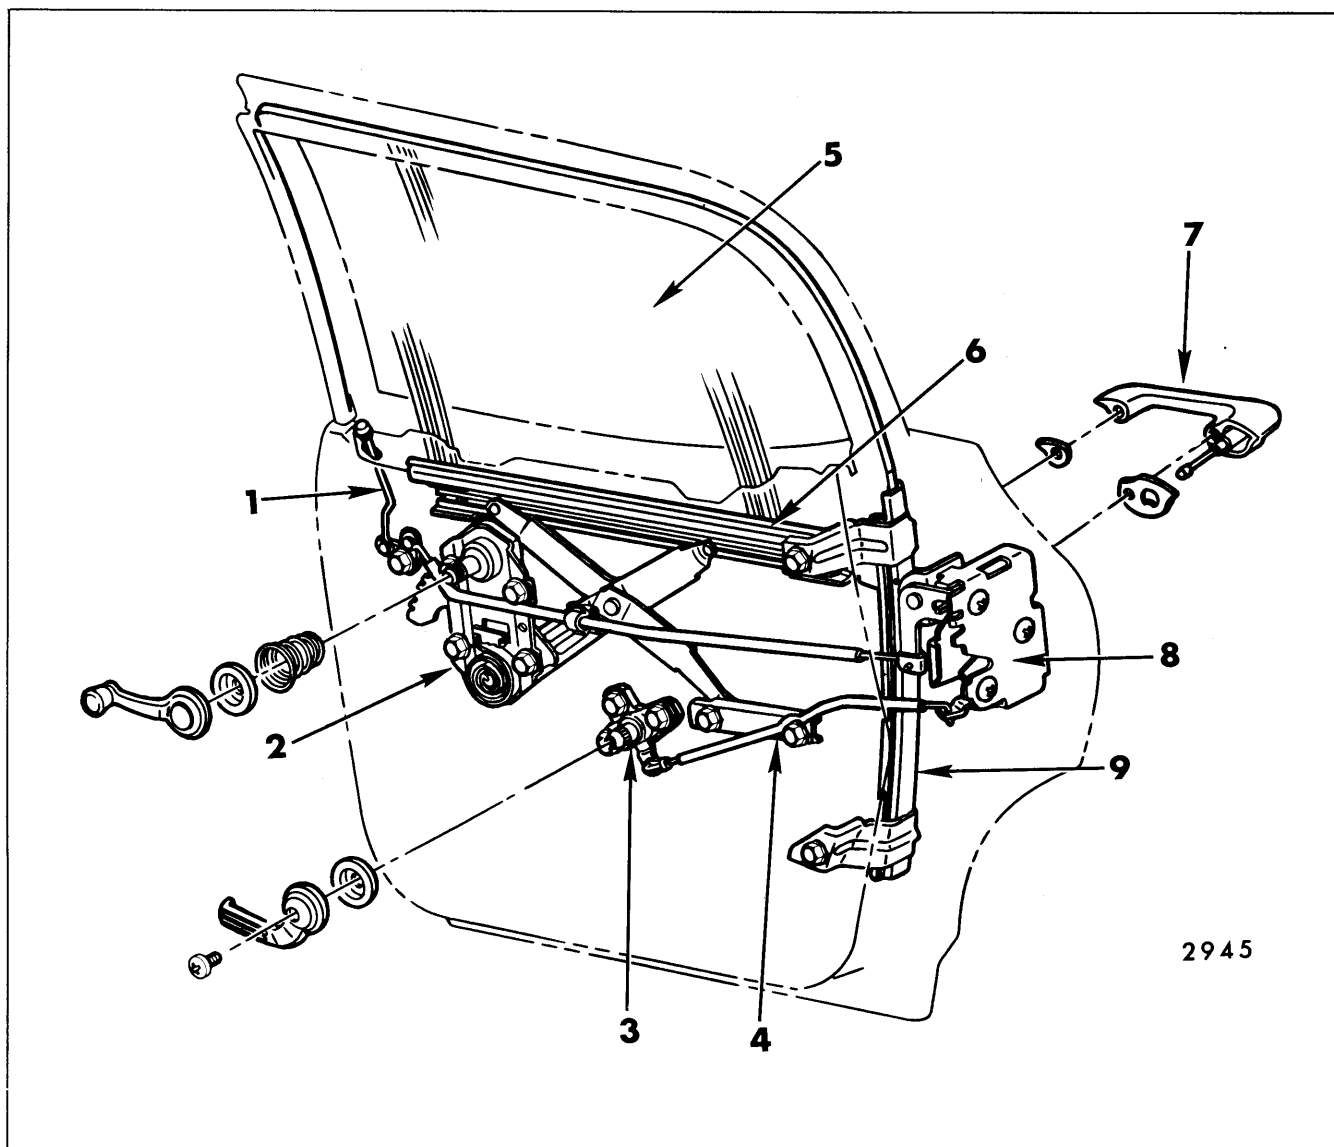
Rear Door Hardware - "A" Closed Styles
